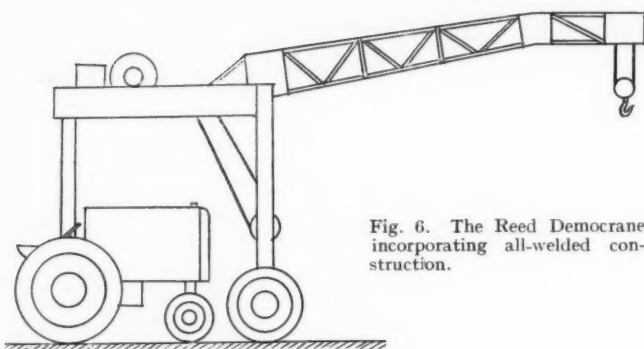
The Reed Democrane incorporating all-welded construction.
